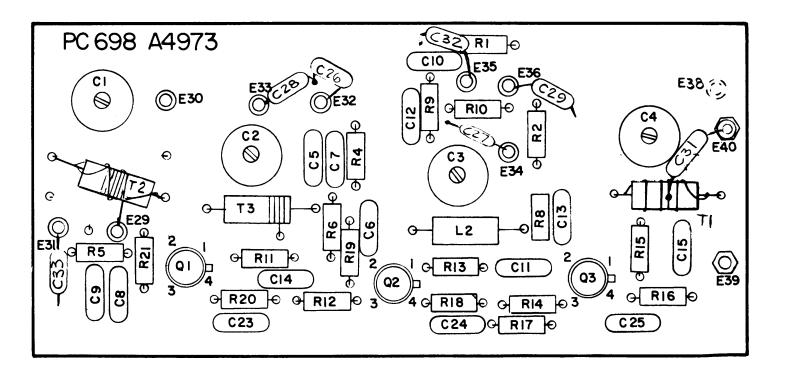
Differential Amplifier Assembly Z306, Location of Components
